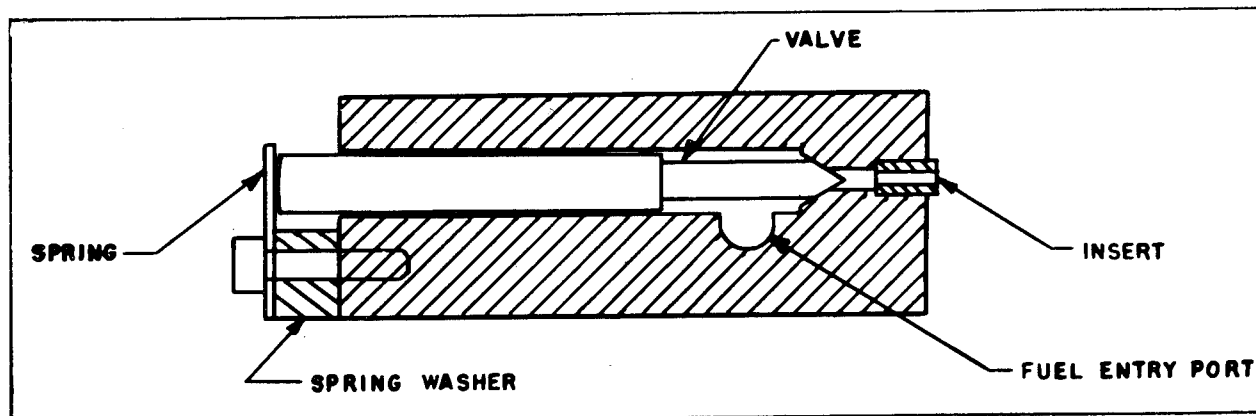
Schematic drawing of individual valve construction of nozzle 5.
